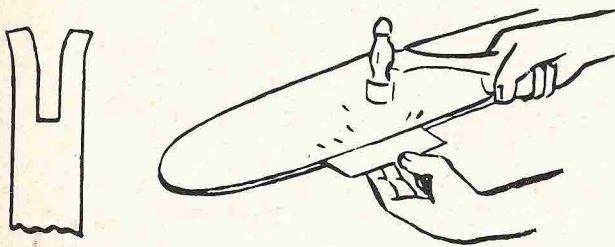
Closing spread guide rails. Use steel shim .004" thicker than drive link tangs.
